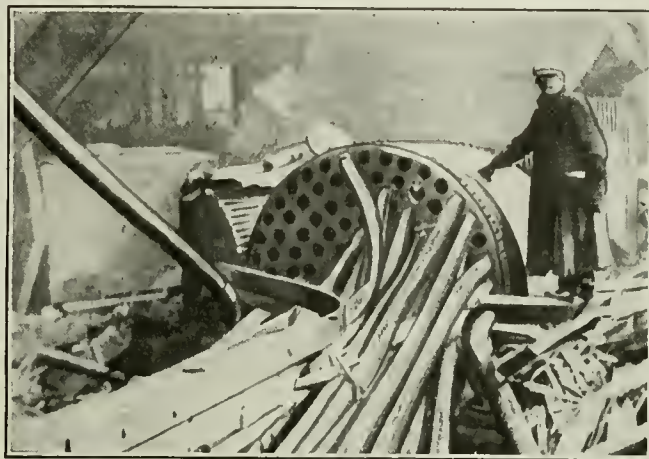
UPPER DRUM AND TUBES SHORTLY AFTER THE EXPLOSION
